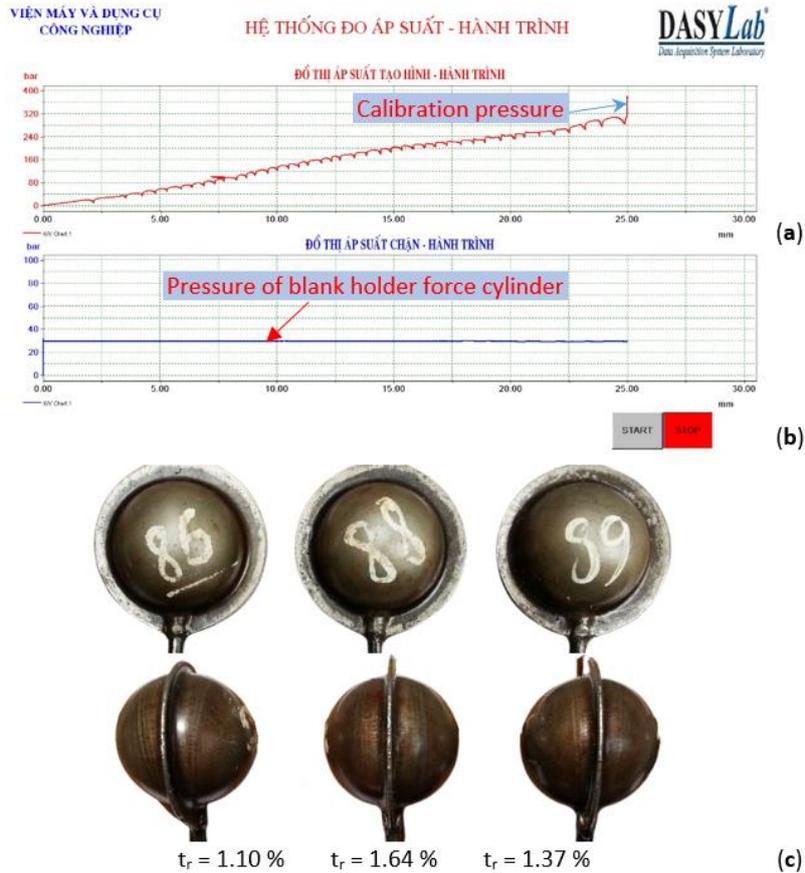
Measurement graph including forming pressure (a) and blank holder force (b); successfully formed parts (c).
